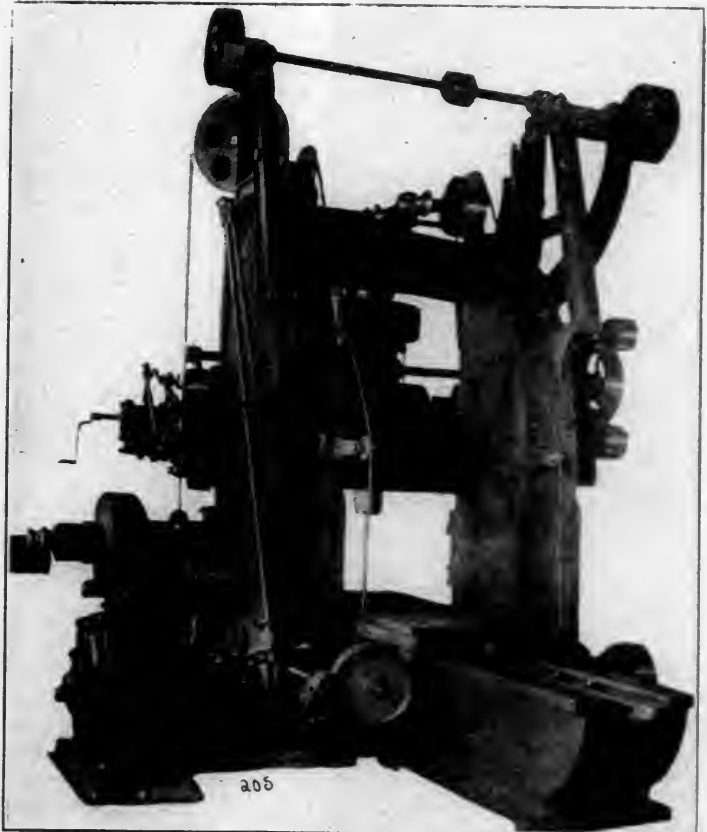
REAR VIEW OF THE INGERSOLL MILLING MACHINE, SHOWING ARRANGEMENT OF MOTOR AND DRIVE.
